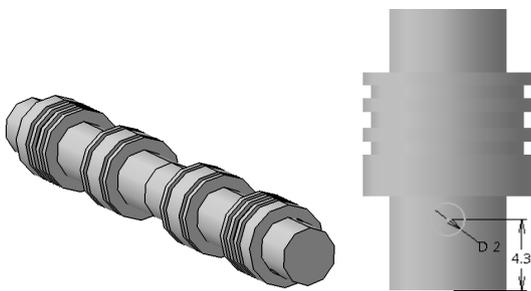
Valve extruded section. Fig. 6 Circle sketch Ø2.
